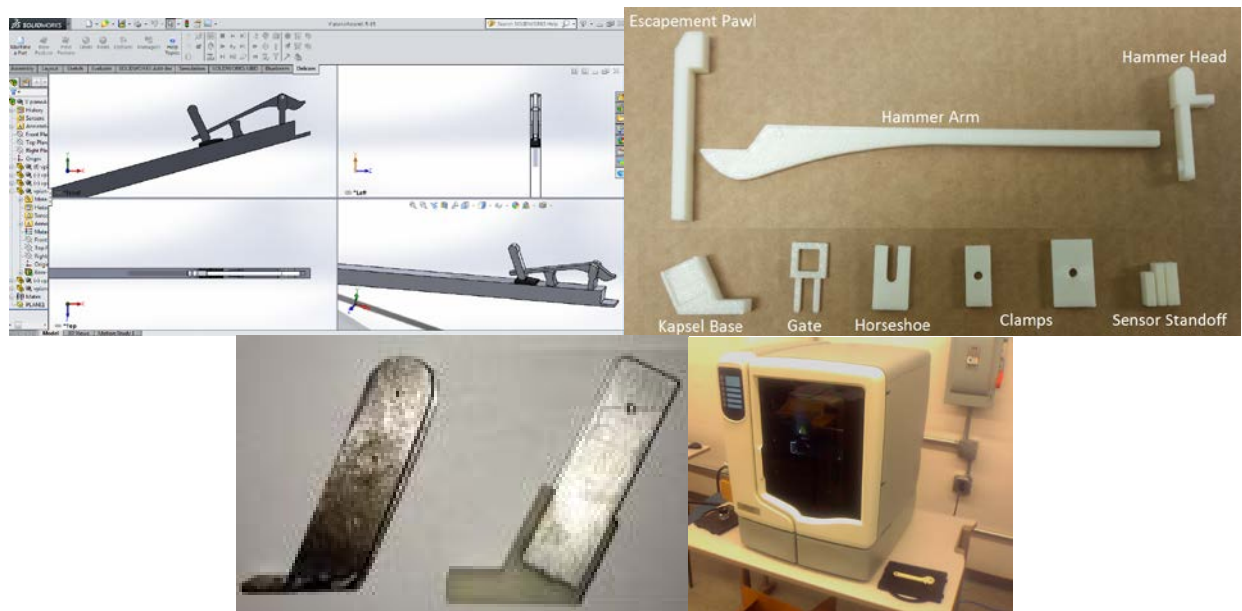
SolidWorks rendering of CAD models (top left); 3D printed ABS components (top right); Steel and ABS Plastic/Aluminum Kapsel (bottom left); The Stratasys® uPrint 3D Rapid Prototyping machine used for 3D printing key components (bottom right).
